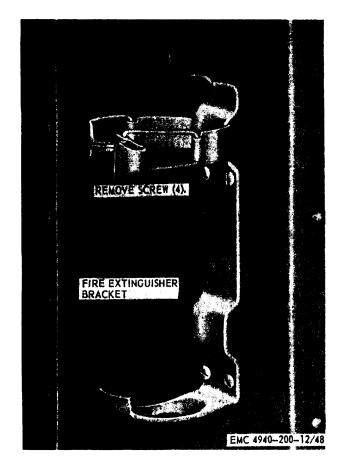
Fire extinguisher back-et, Model SECM, removal and installation.
